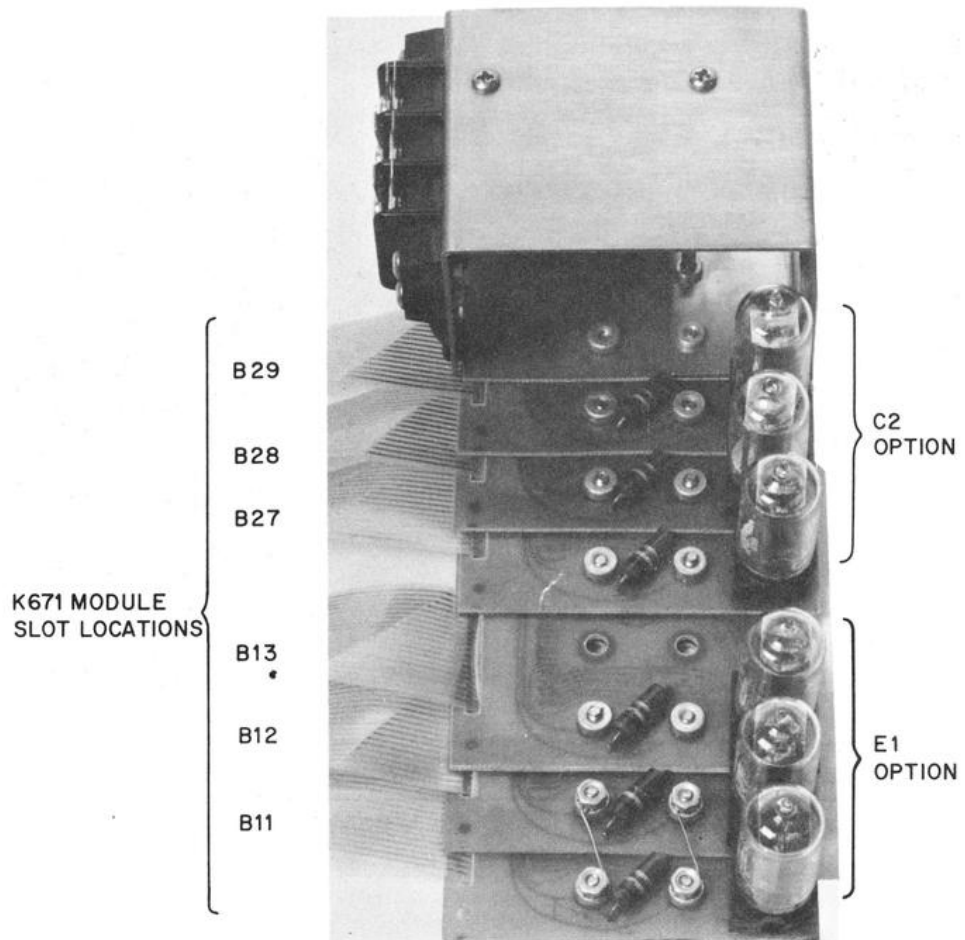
(Sheet 2) C2, E1 Options – Assembly Instructions
